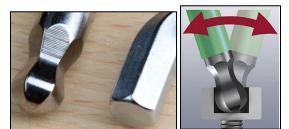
Ball end Allen key tool. It could be inserted at an angle [43]
